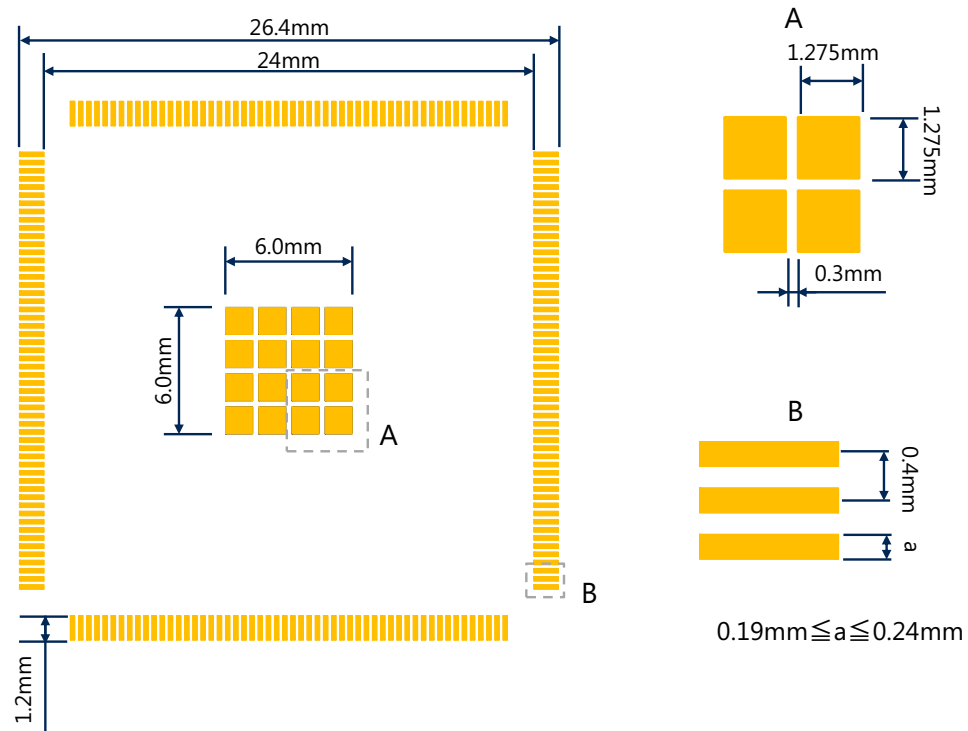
EP-LPQF216 exposed pad soldering pattern
